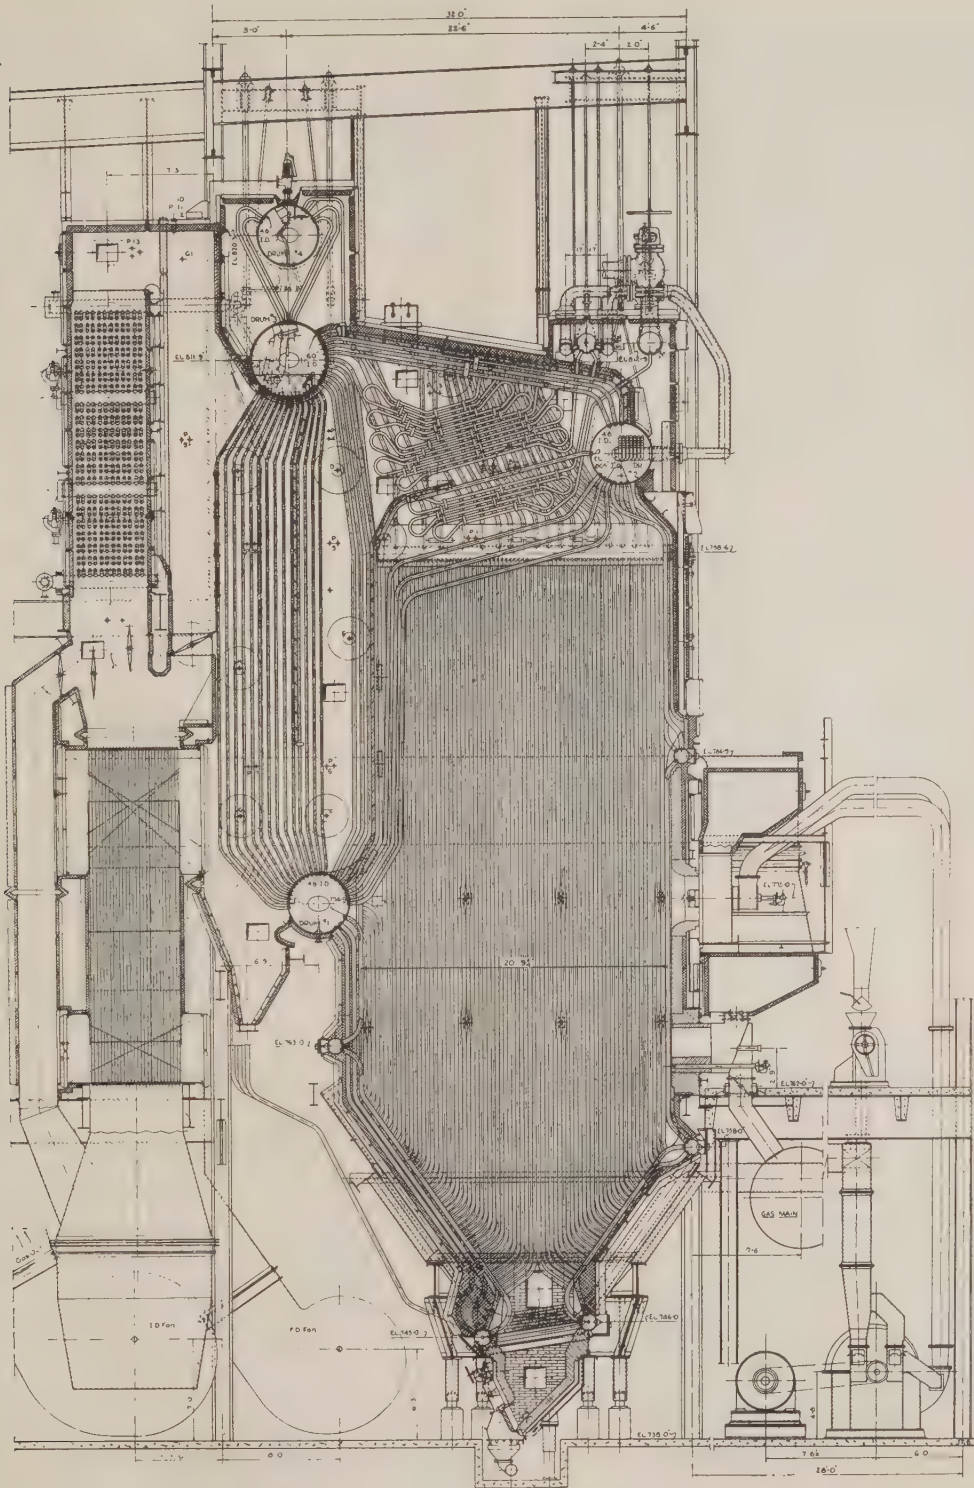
450,000 LB PER HR BOILER UNIT OF CARRIE FURNACES PLANT, CARNEGIE ILLINOIS STEEL CORPORATION
